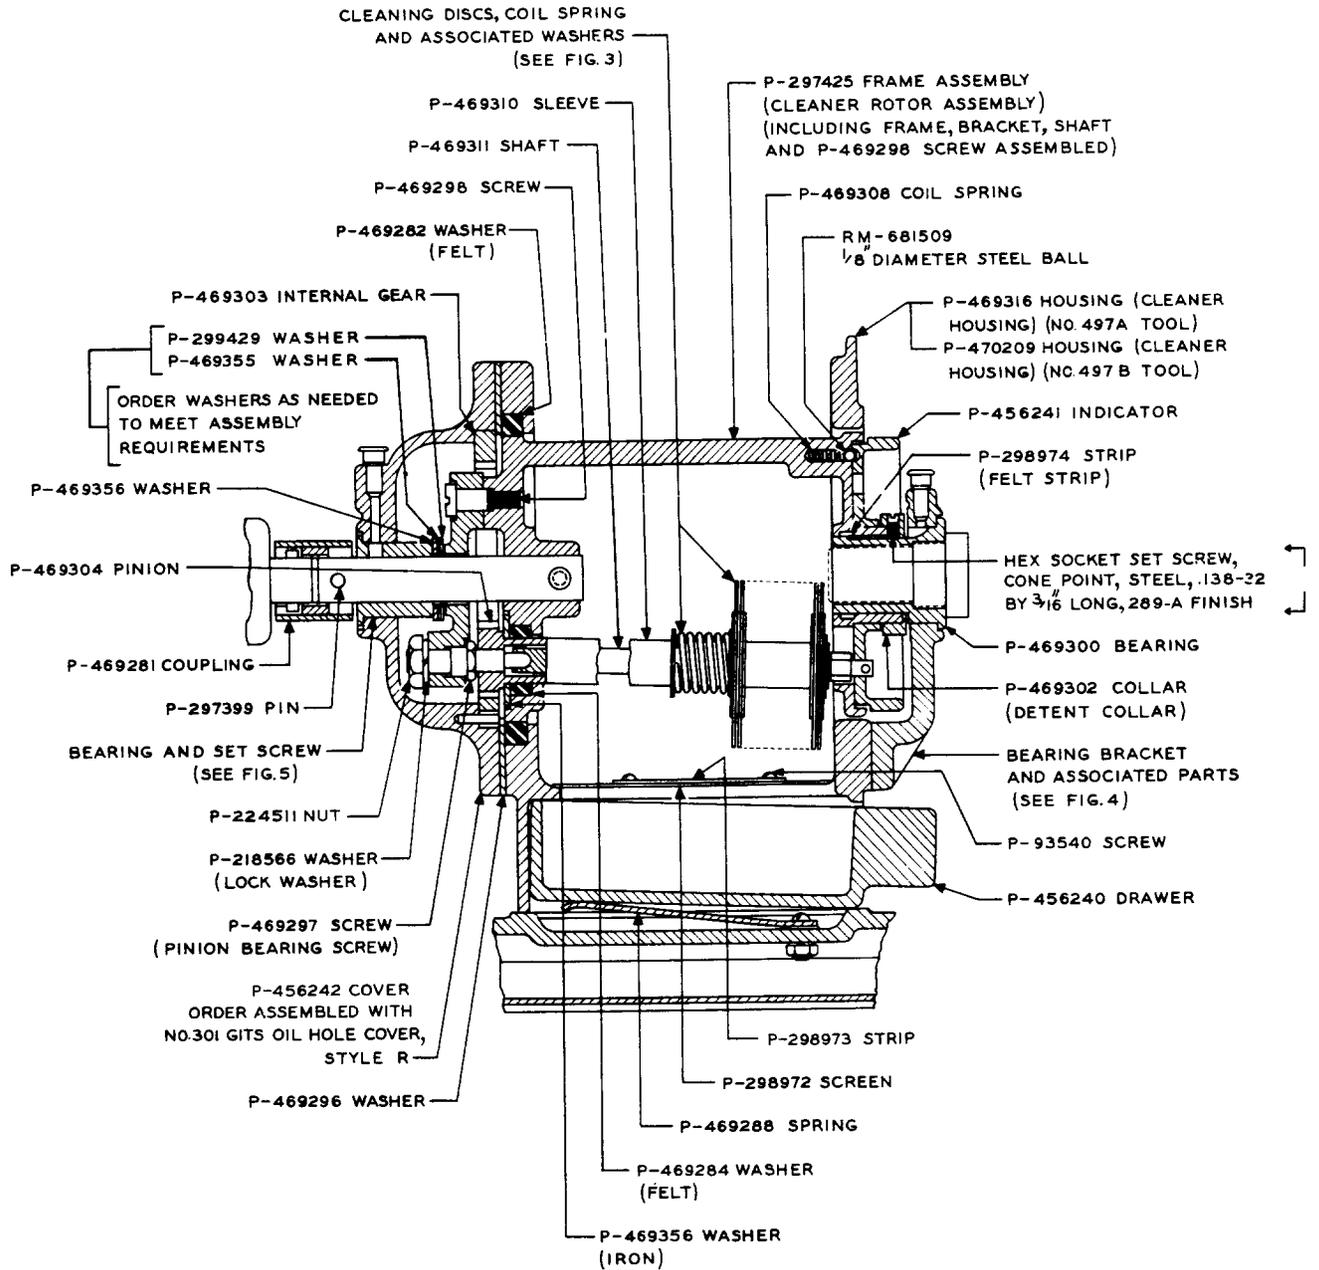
Cross-section View of Cleaner Housing Showing Gears, Bearings, Indicator, and Associated Parts
